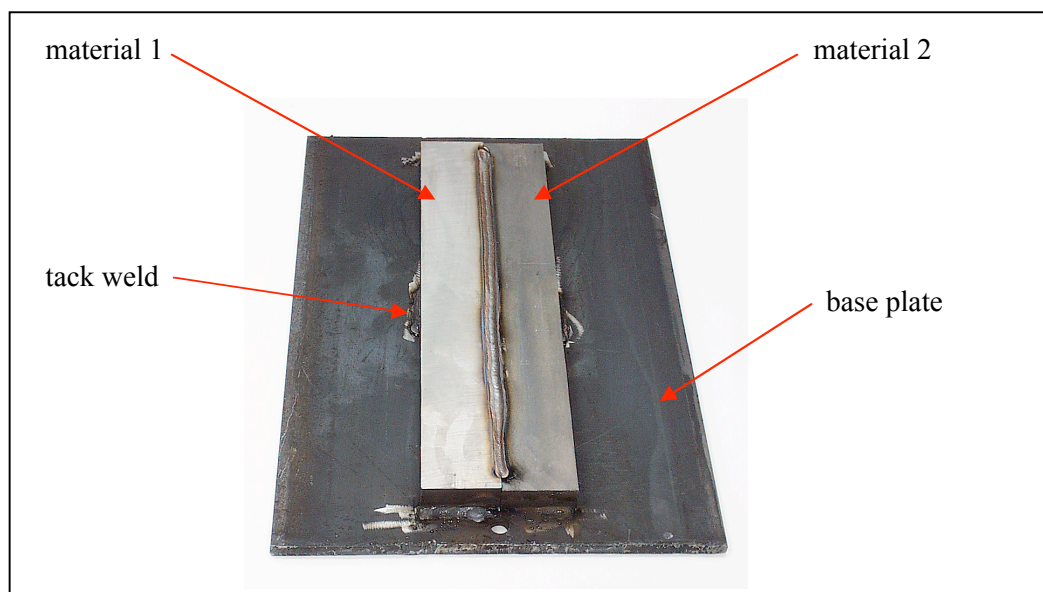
The configuration of a sample in the GTAW welding experiments.
